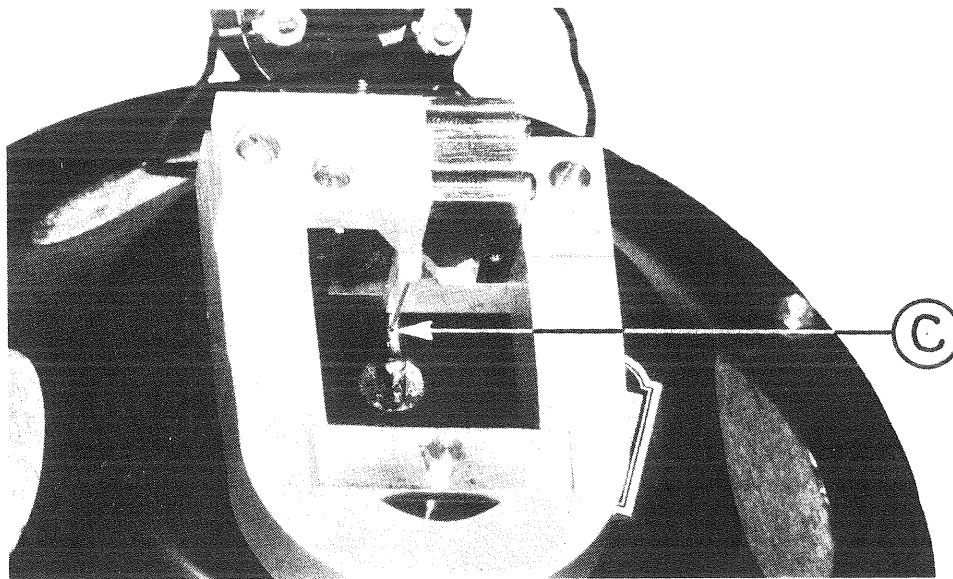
The drive-pin thrust-lever connecting point (C) which is soldered
